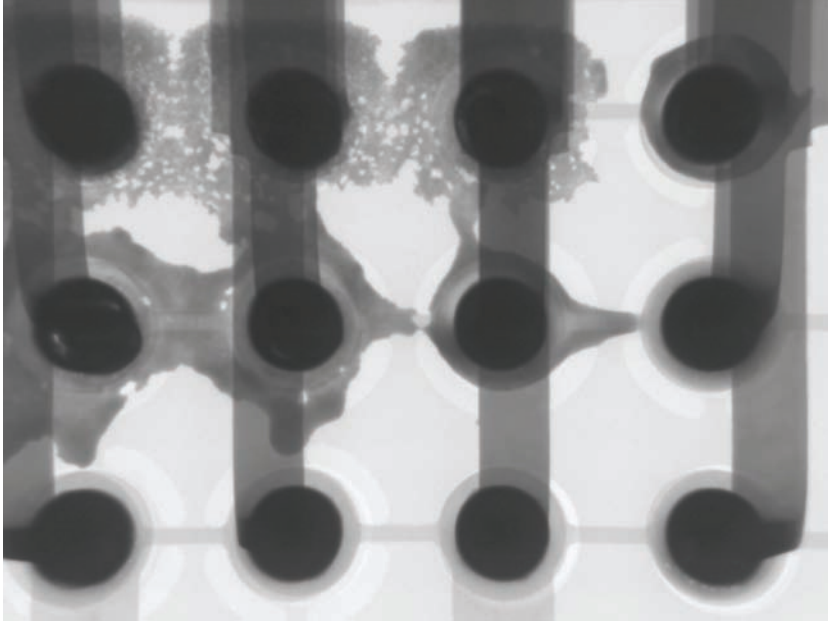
Close-up x-ray image taken around the centre section of the connector shows incomplete reflow of the solder paste on the surface of the board. Through-holes on the bottom line have filled.
